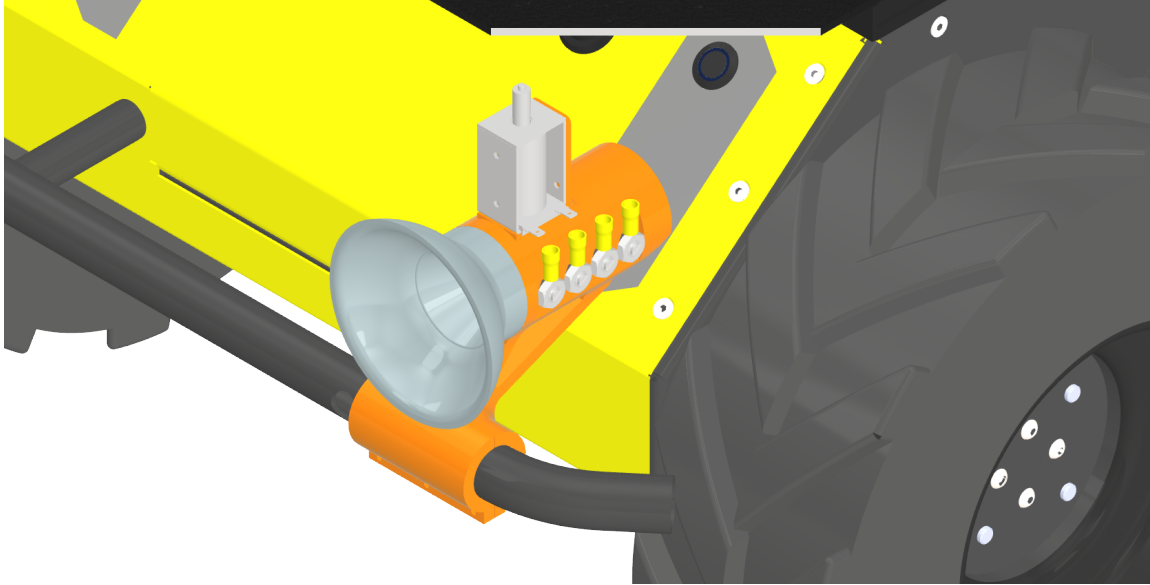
Optional female mounting configurations include a bumper mount for the Clearpath Husky UGV.
